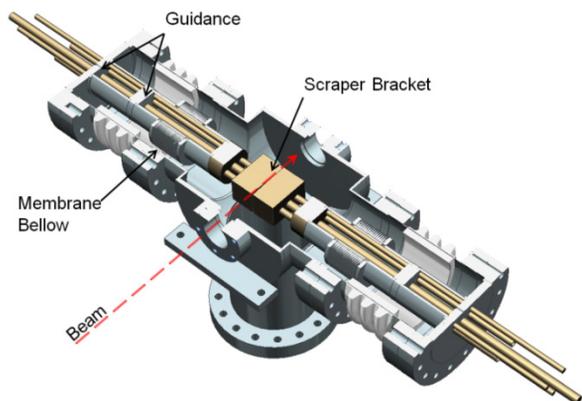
3D-CAD model showing the sectional view of the scraper system.
